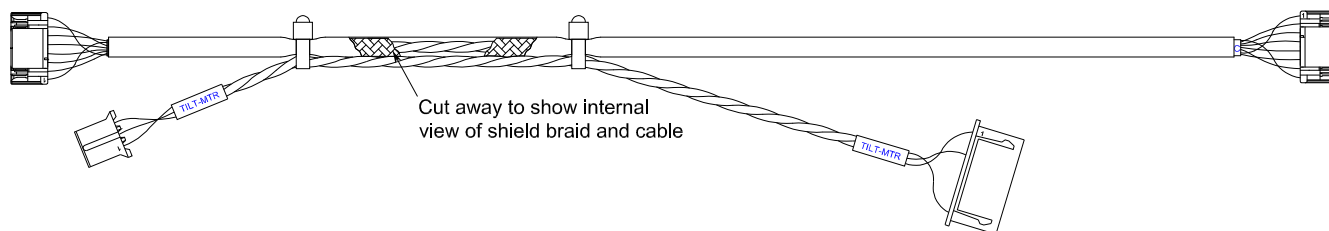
VL4000 Tilt with Shield Cable Assembly
